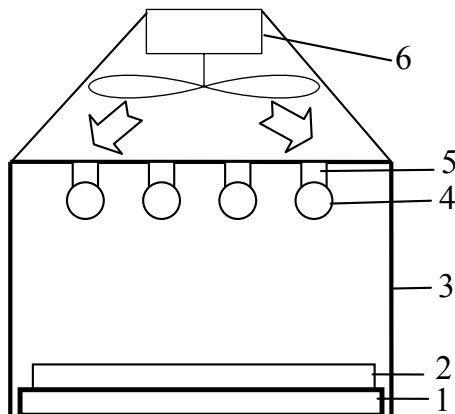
Scheme of experimental welding equipment for plastic details with halogen lamps. 1 – fixture accessory for the detail; 2 – plastic detail; 3 – reflectors; 4 – halogen lamps; 5 – fixture accessory for lamps; 6 – fan.
